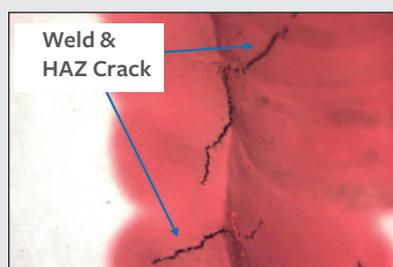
(b): Low magnification stereomicroscope images revealed cracking in the weld and HAZ
